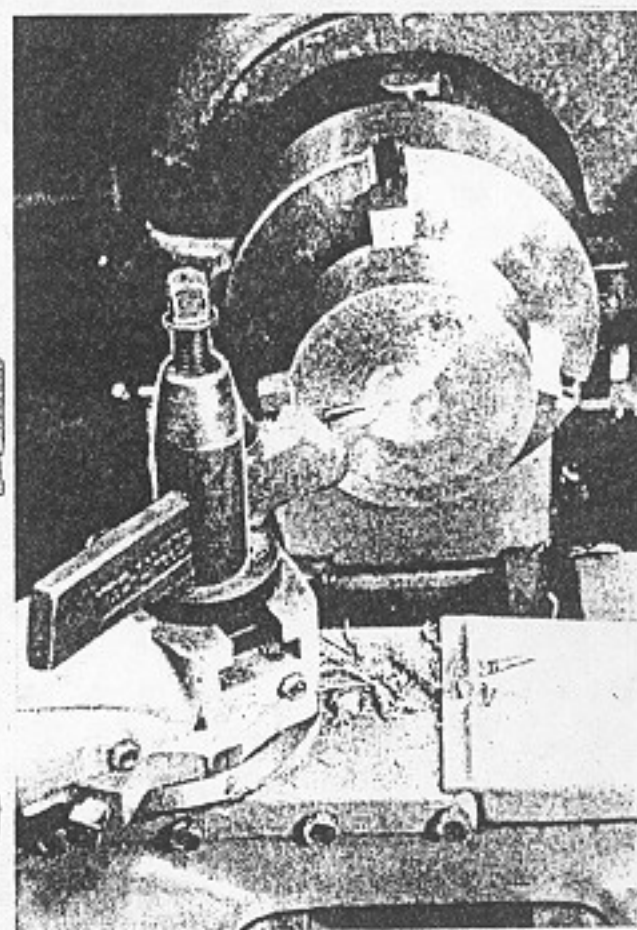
In setting the tool, it may help to set it to the point of a center before the chuck is placed on the headstock spindle.
